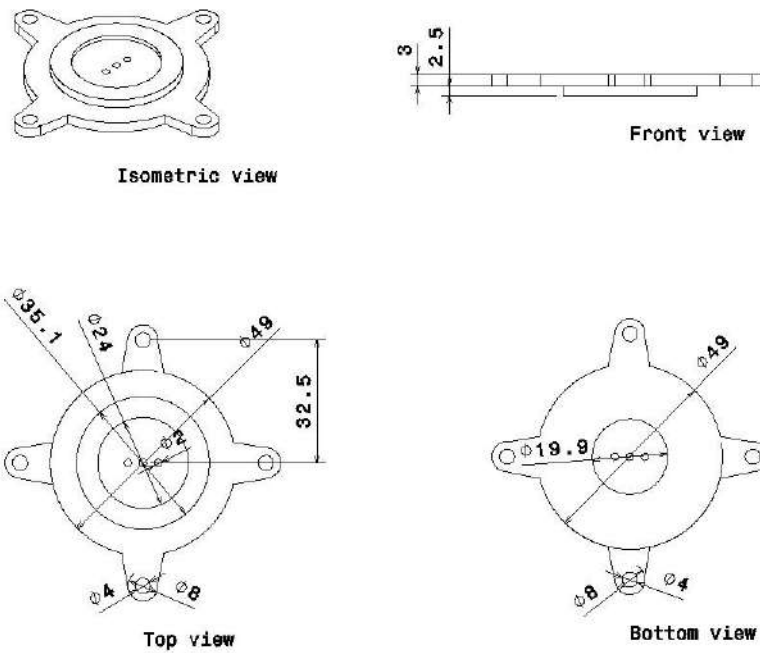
Inferior lid part technical draw with isometric, front, top and bottom views (units in mm).
